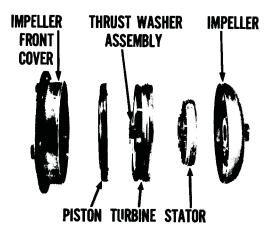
New lock-up converter has clutch to lock turbine to impeller in direct drive.
